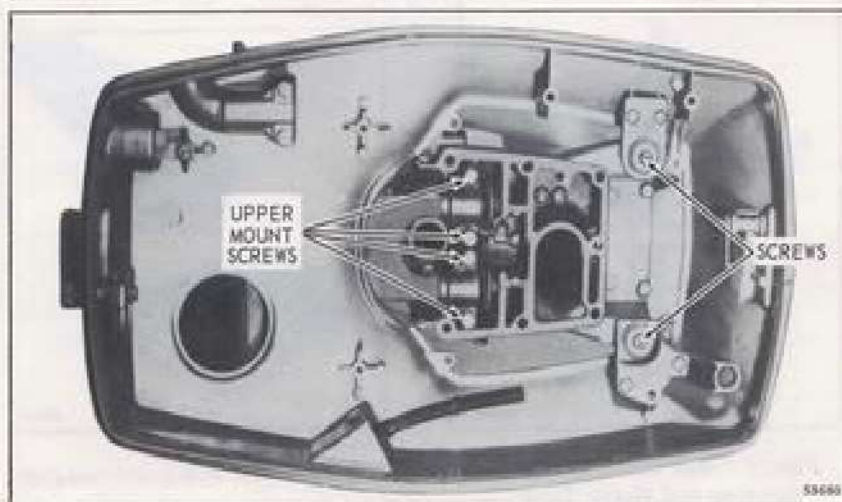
Lower Motor Cover Screws (Standard Length Shown)
